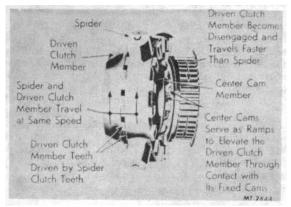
Forward Left Hand Turn (Cross Sectional View)
